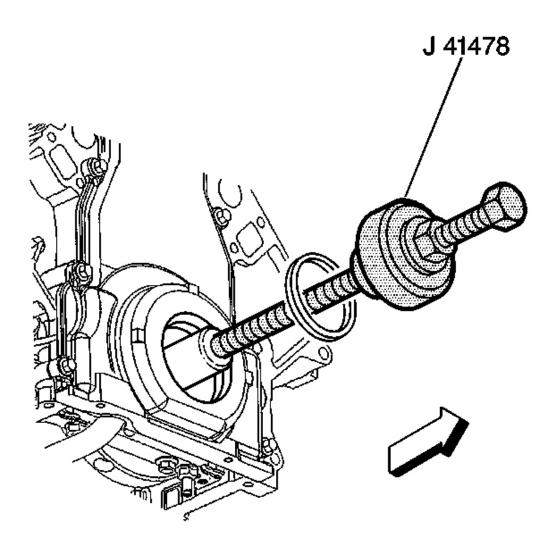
Installing The Crankshaft Front Oil Seal Using J 41478 Courtesy of GENERAL MOTORS CORP.
